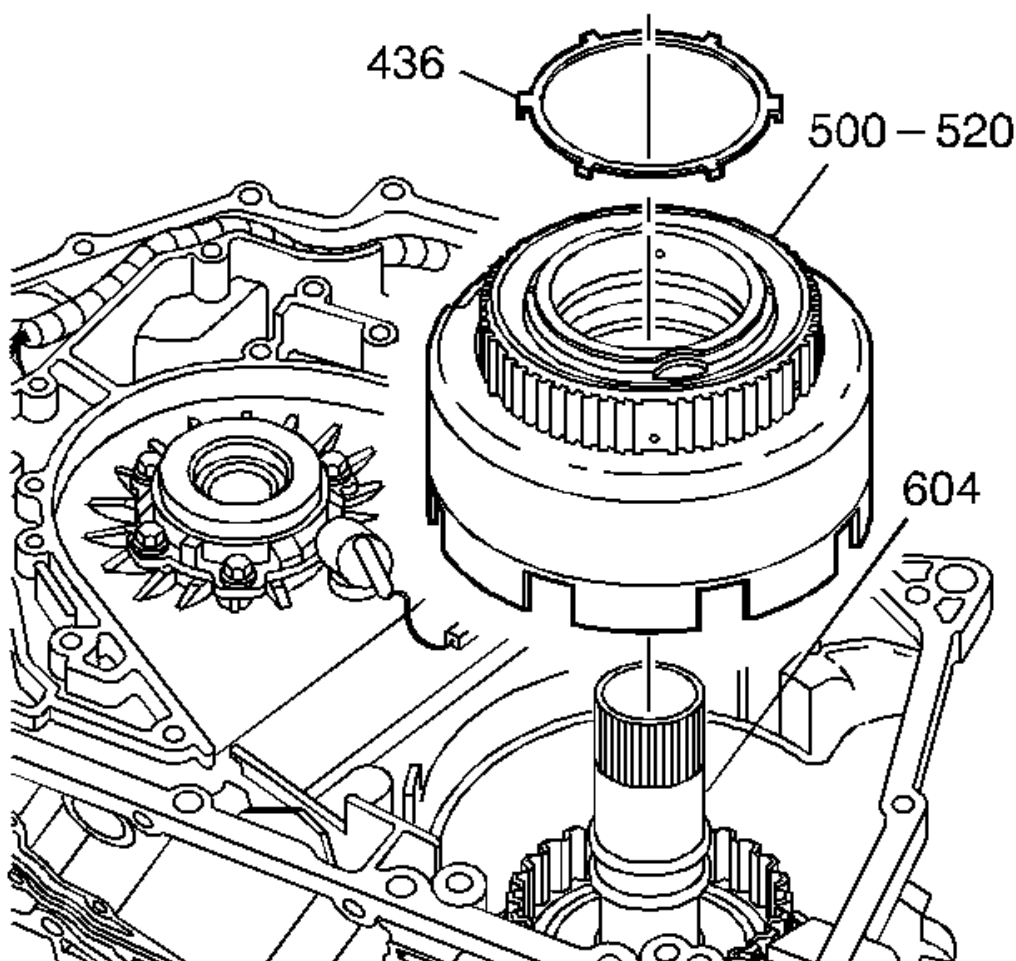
Reverse Clutch Housing & Second Sprag Assembly
